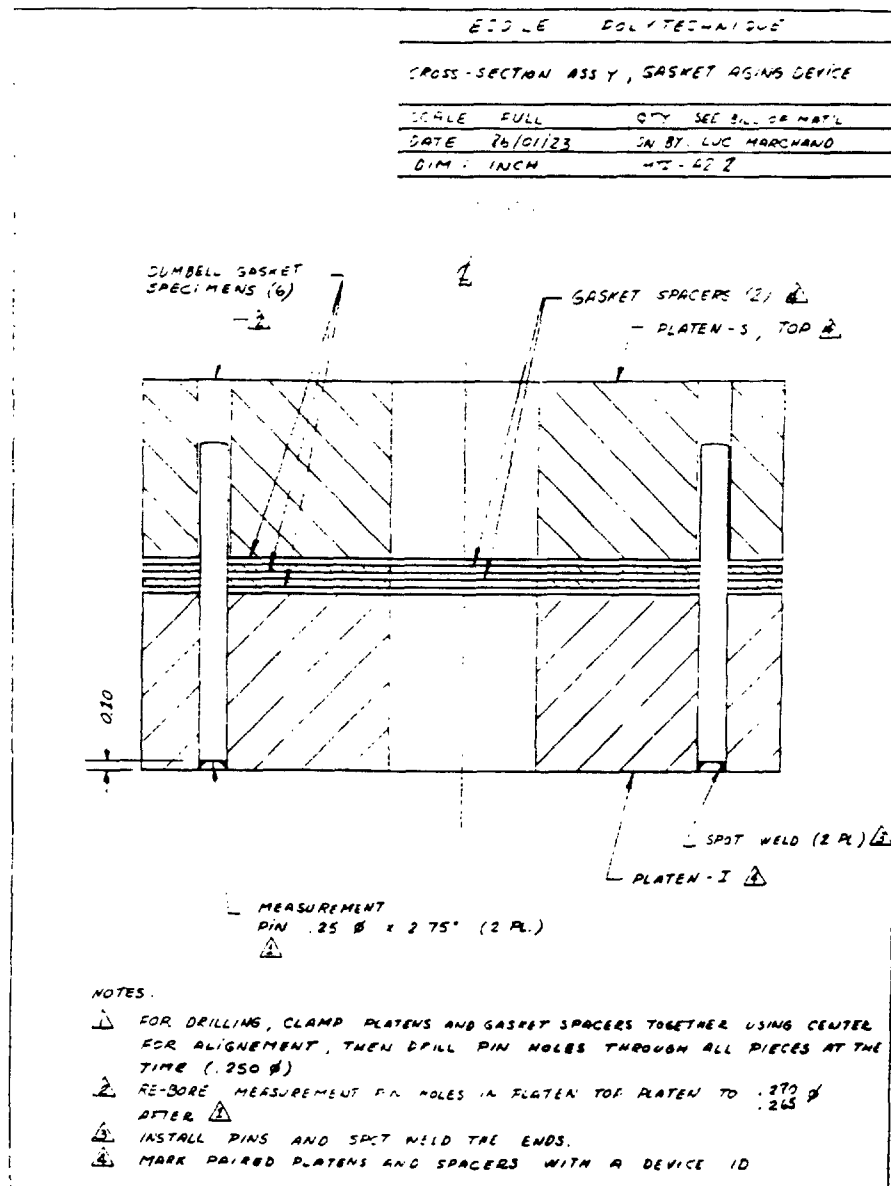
View of Fixture Showing Arrangement of Guide Pins
